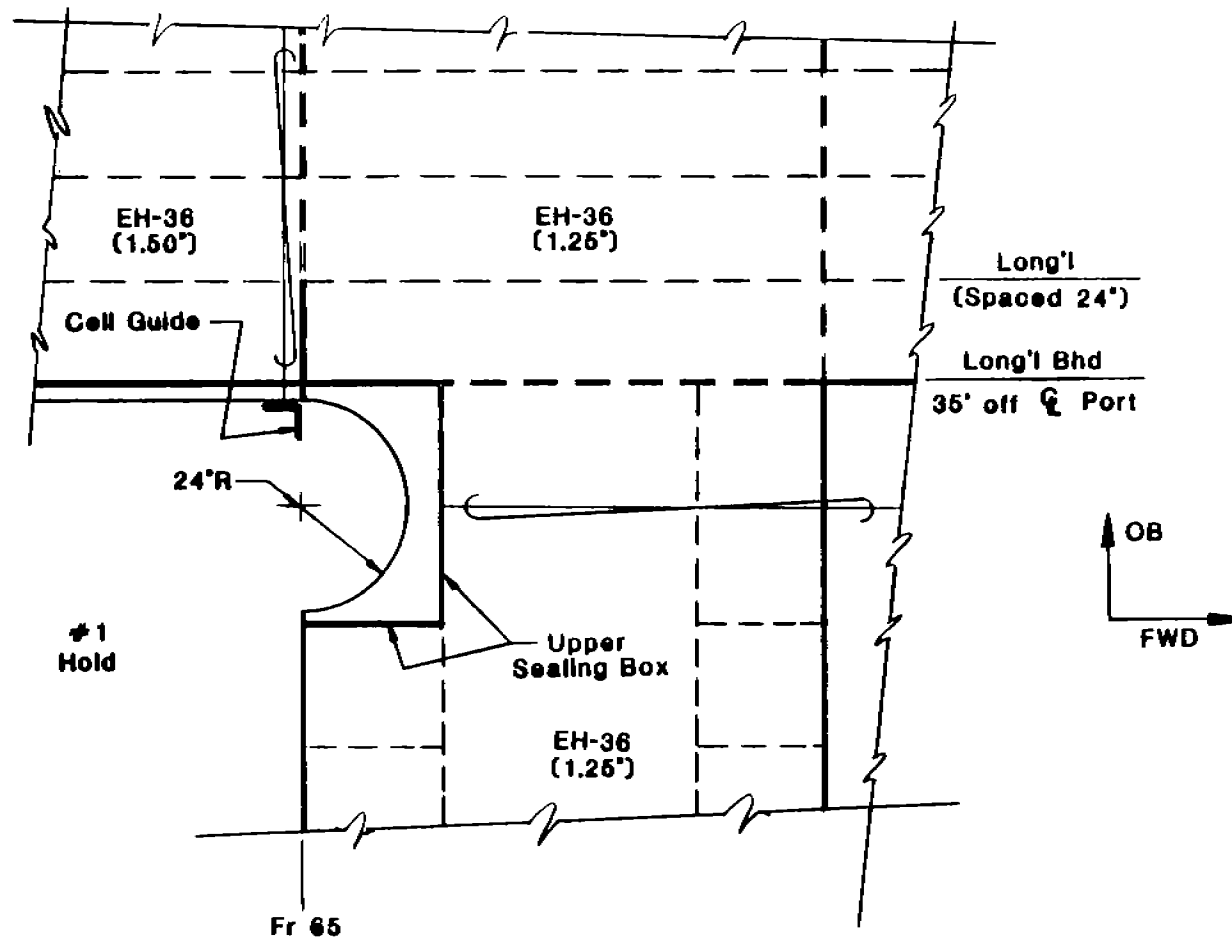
Hatch Cut-out of the Containership With a Fractured Transverse Bulkhead
